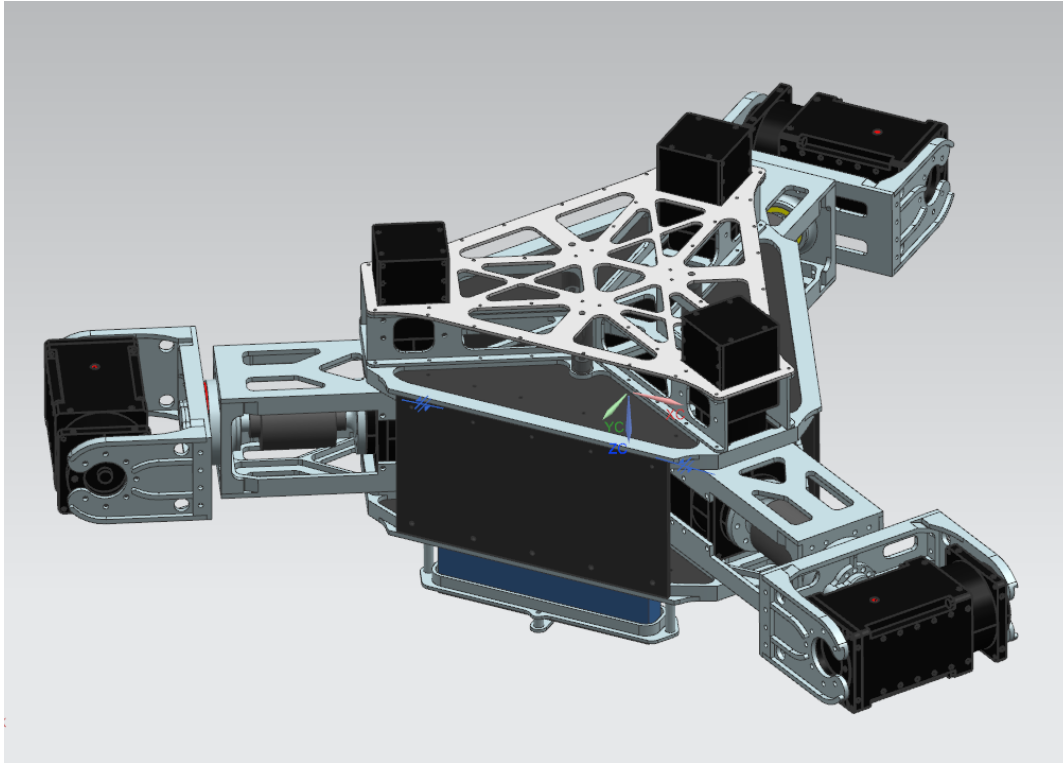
CAD View of Bottom Side of Body and Hip Assembly
